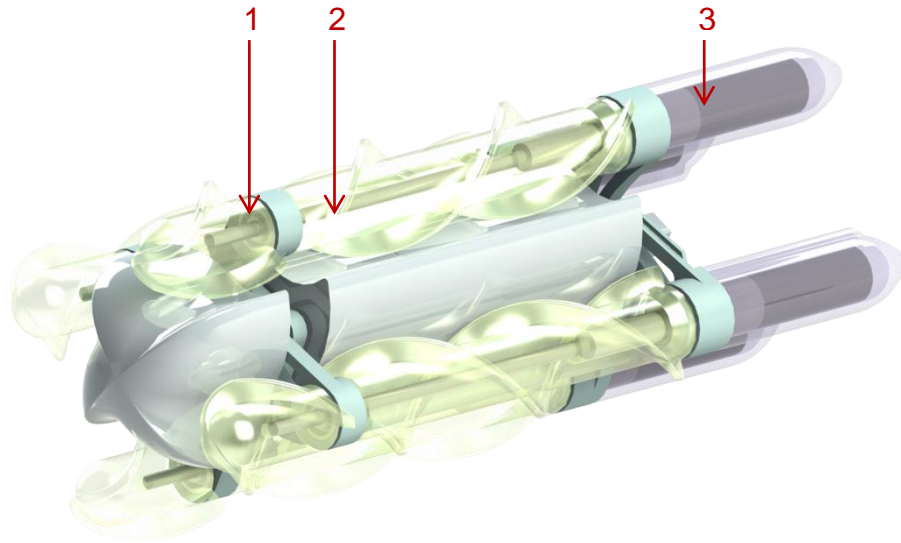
Computer model showing the shafts running along the screws connecting the motors at the back to the front screw sections. Annotations show: 1) Bearing housed within arm; 2) Shaft connecting motor output and screw sections; 3) Screw motor.
